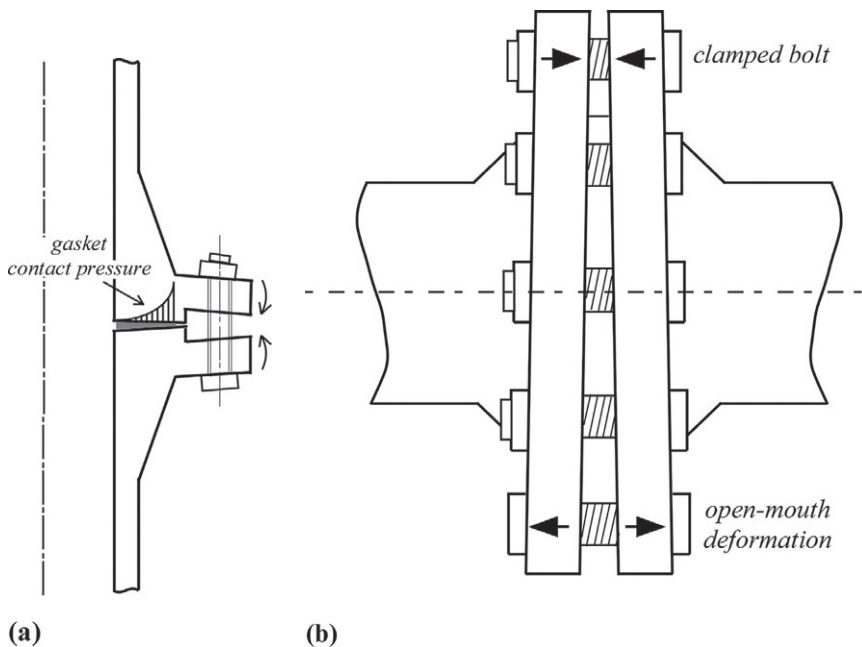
Flange rotation and open-mouth deformation. (A) Flange rotation and (B) open-mouth deformation of pipe flange.
